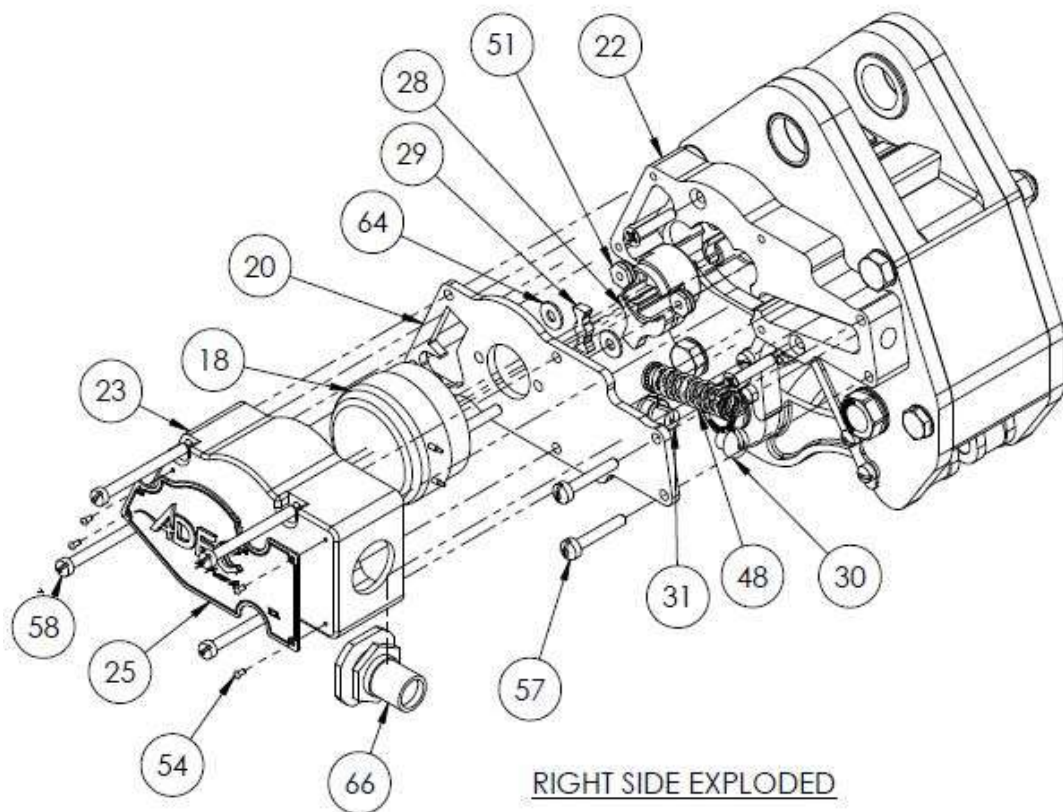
Model 350 ADEC™ Right Side Exploded View (Externals)
